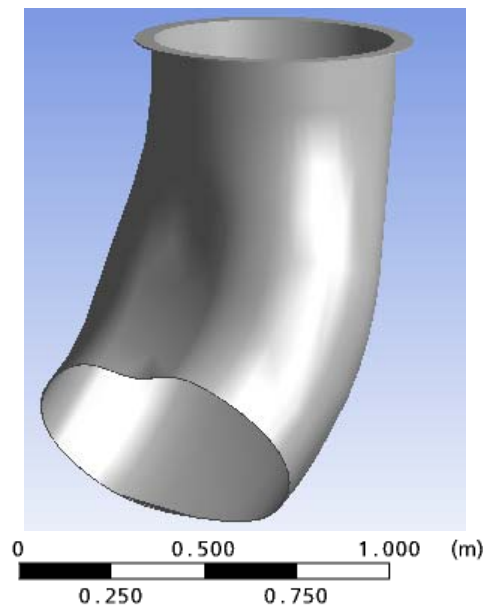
Final optimized Compressor Inlet Duct: Kidney-shaped.
